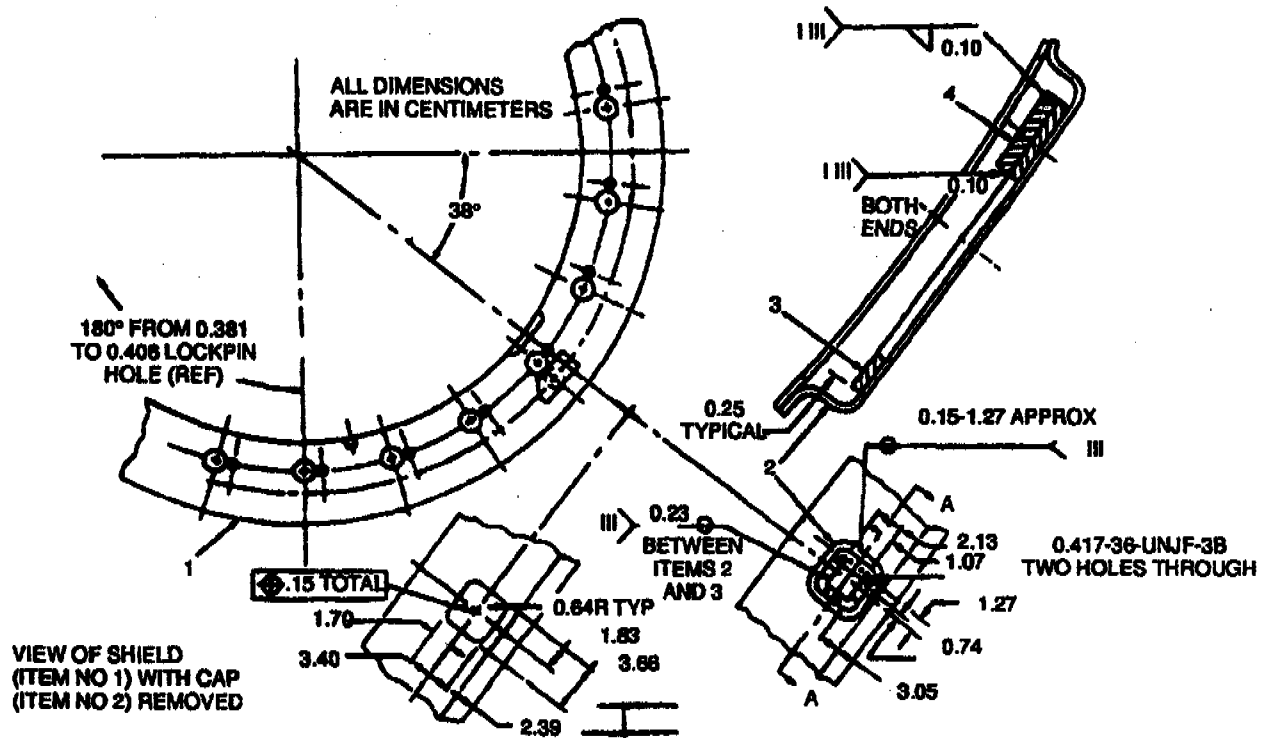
Rework of Exhaust Diffuser Assembly.
